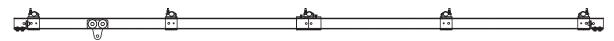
System with multiple track sections connected with a joint support.
